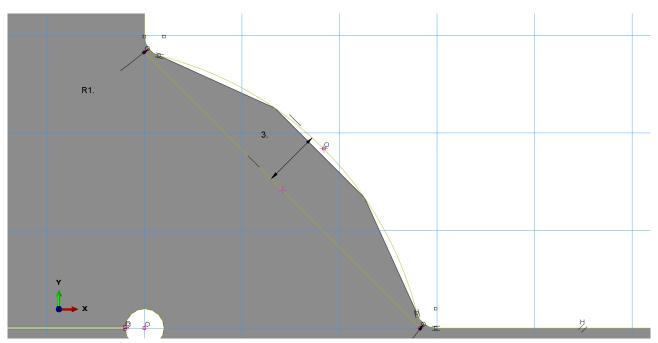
Imperfections at the fillet weld of quality level "B" cruciform joints. (all measures are in millimeters)
